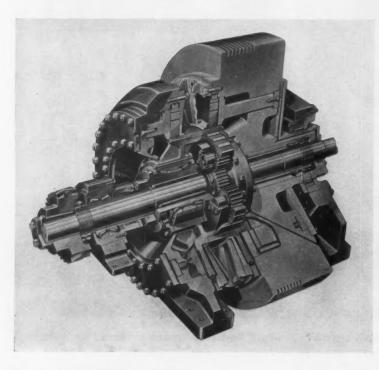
Press developed by the Clearing Machine Corporation for rapid production of deep-drawn stampings
